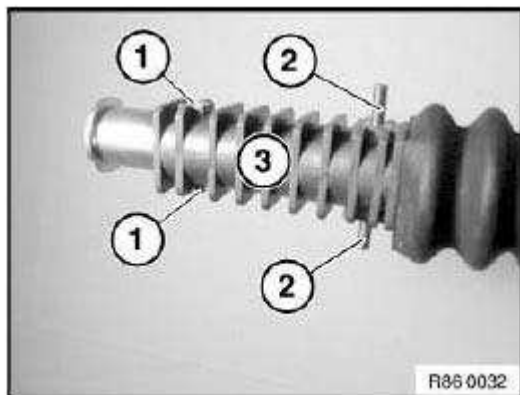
Identifying Spacer Tubes, Threaded Pins & Guide Bush
